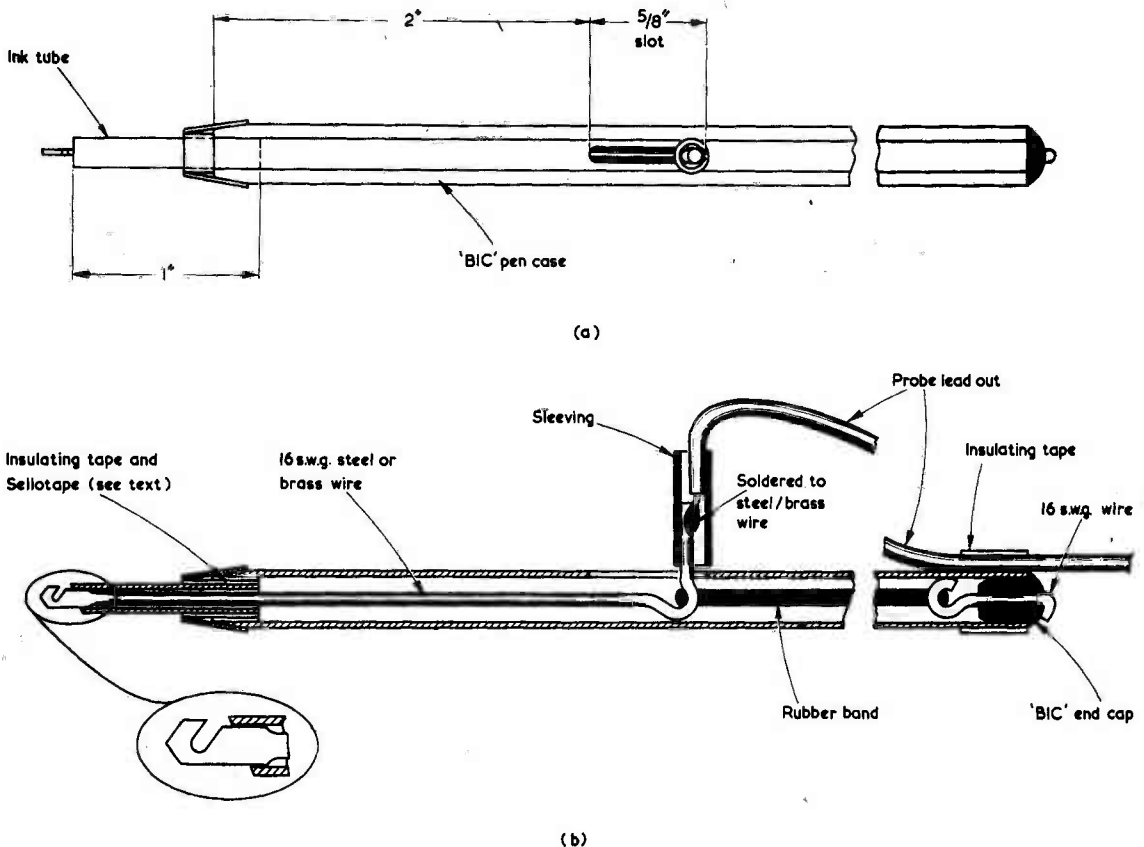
(a). Side view of the probe-clip. This is assembled in a discarded "Bic" ball-point pen
